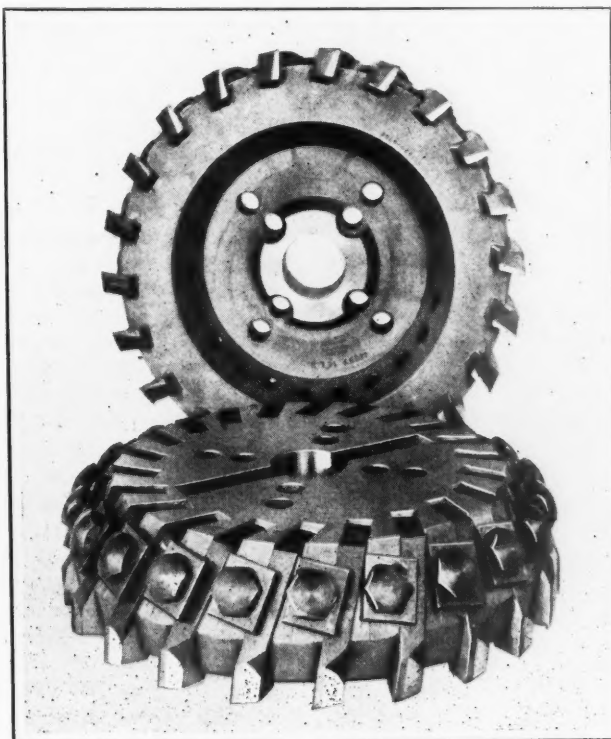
Twenty-two-inch Heavy-duty Milling Cutters used on the Machine shown in Fig. 1
